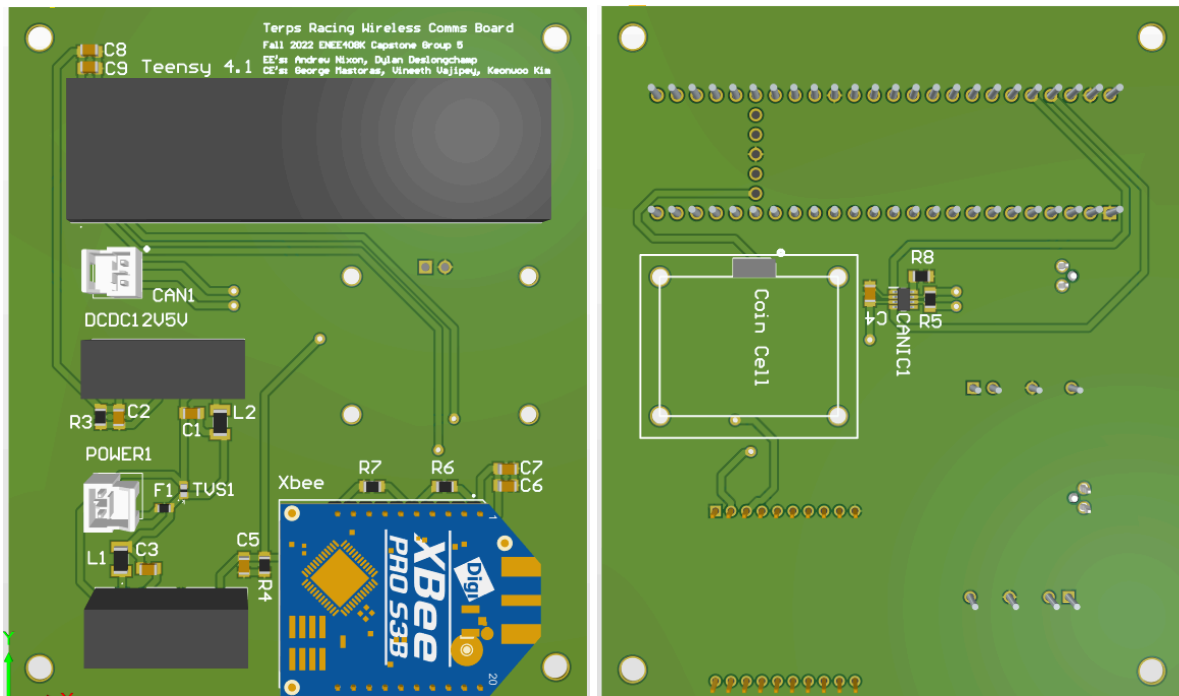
The front (left) and back (right) of the final PCB in 3D layout mode.
